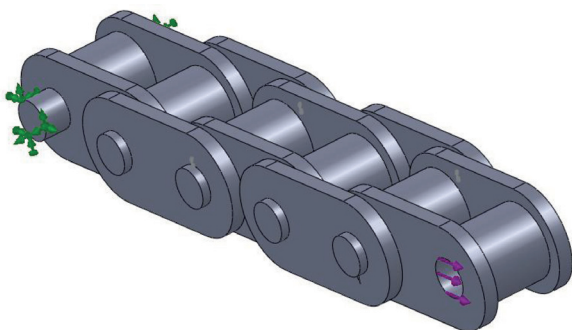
Model of the chain assembly. Boundary conditions are marked: the rear pin is fixed (green), which corresponds to its sitting in driven gear, while the front link is loaded with a force (purple) resulting from a driving torque
